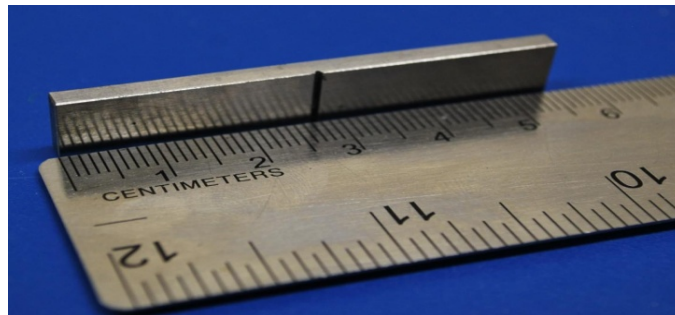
A Sample Sub Size Specimen for Charpy Test
